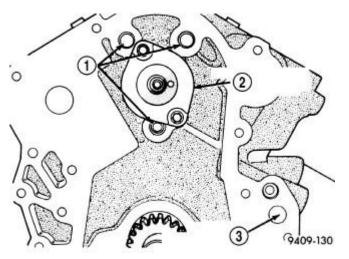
Camshaft Thrust Plate Courtesy of CHRYSLER LLC
